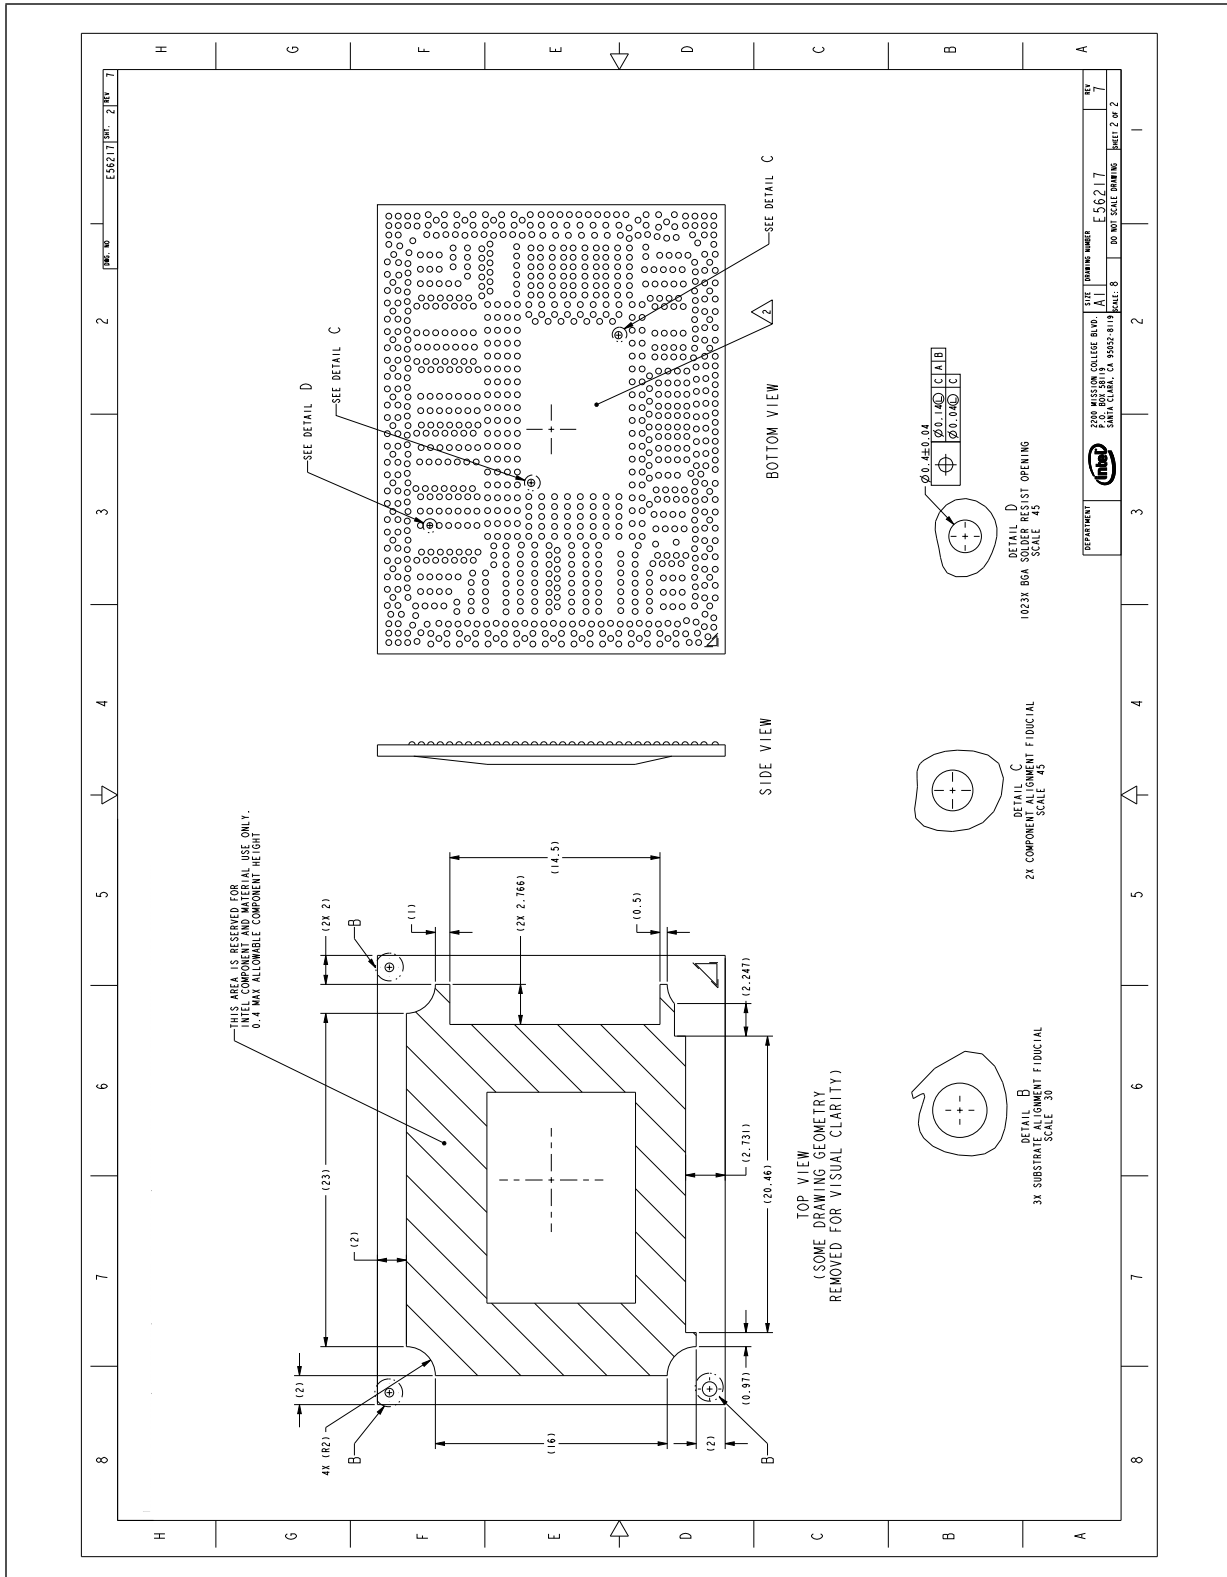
Processor BGA1023 2C (GT2) Mechanical Package (Sheet 2 of 2)
